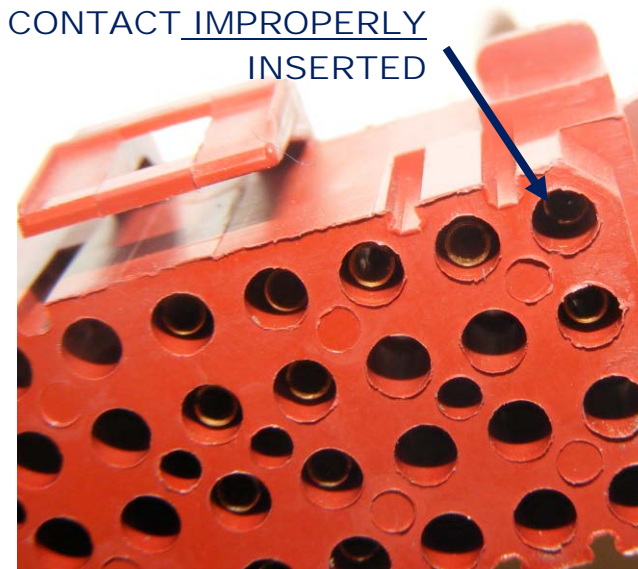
, CLOSE-UP VIEW OF CONNECTOR SHOWING CONTACT NOT FULLY INSERTED
